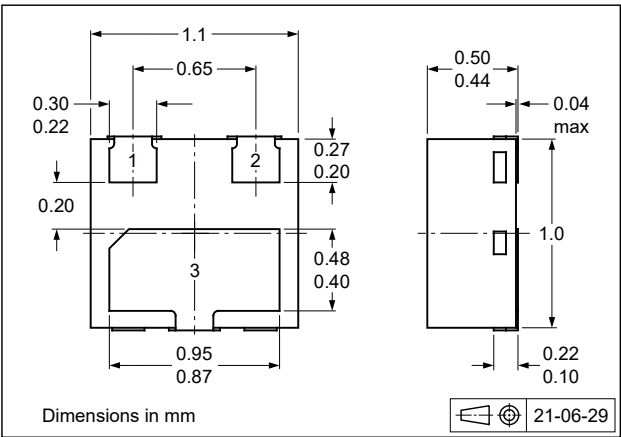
Package outline DFN1110D-3 (SOT8015)
